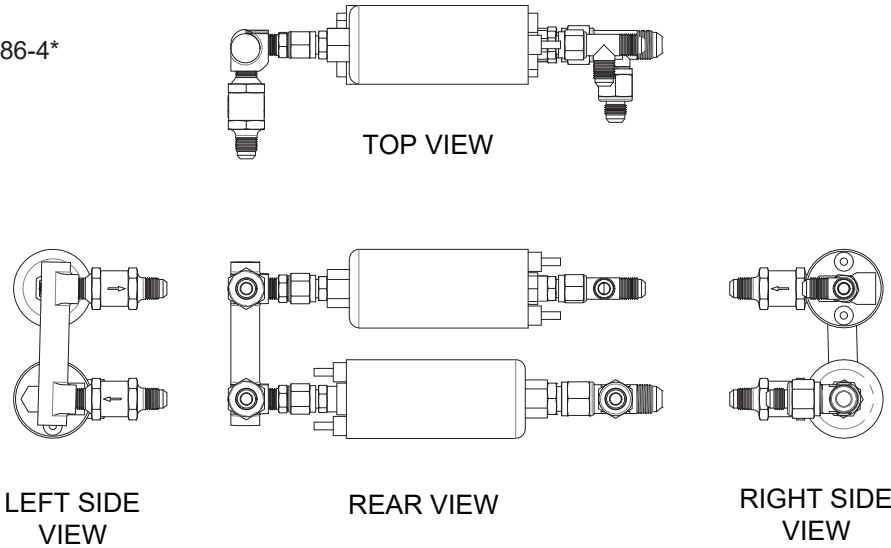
MAIN FUELPUMP ASSEMBLY
